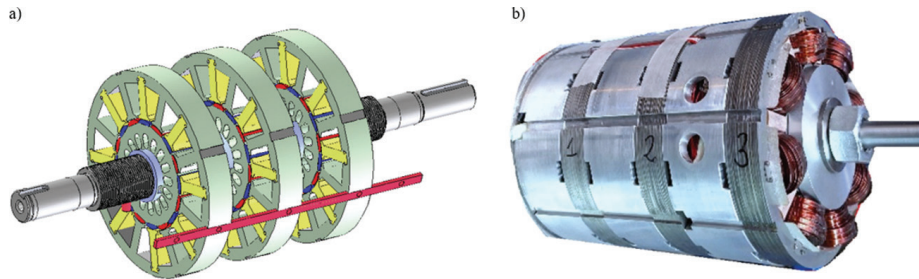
(a) General concept of the rotor construction and (b) wound stator segments with separator elements prepared for assembly in the housing.
